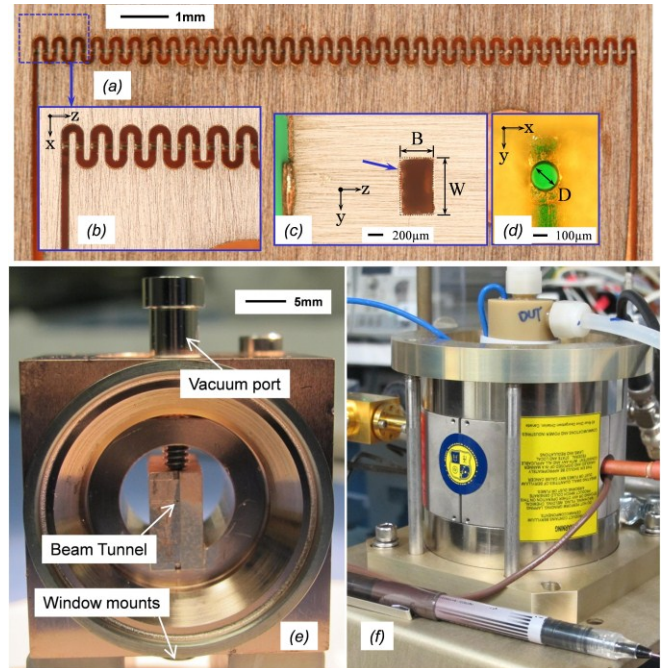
(a) Micrograph of completed circuit, and (b) zoomed view with 0.0072 inch diameter gage pin installed in beam tunnel. (c) View of completed input waveguide. (d) View of beam tunnel entrance. (e) Final brazed circuit assembly into tube vacuum body. (f) Final tube under hot test.
